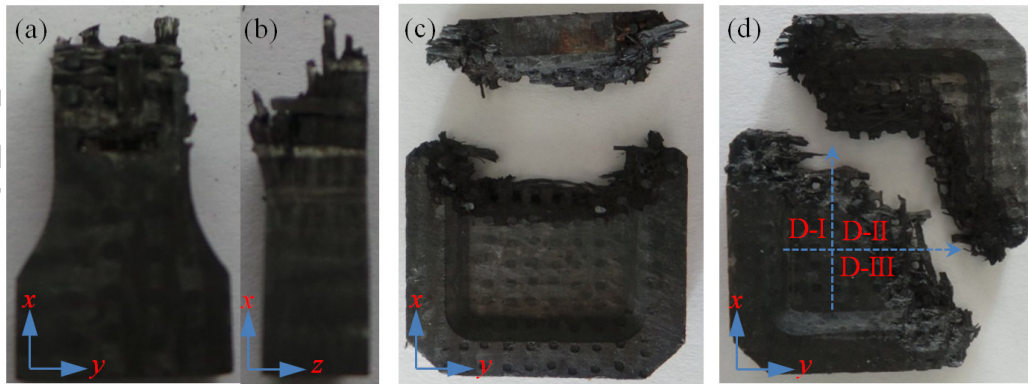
The fracture photographs of 3D C/C composite: (a) an elevation view under
